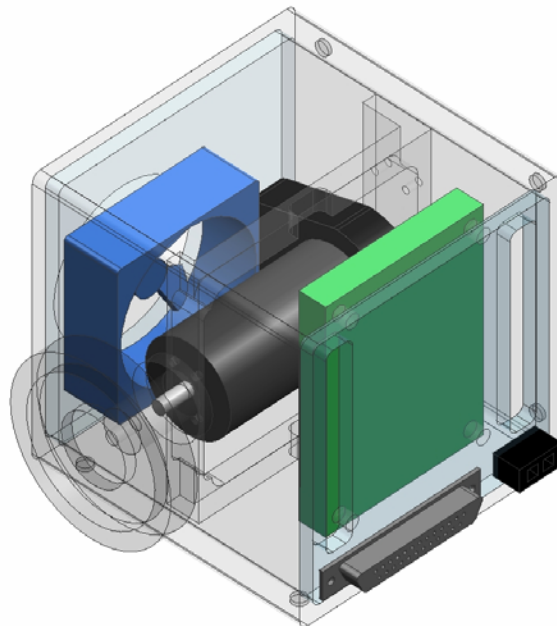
Drawing depicting electrical components and how they fit within the haptic box.
